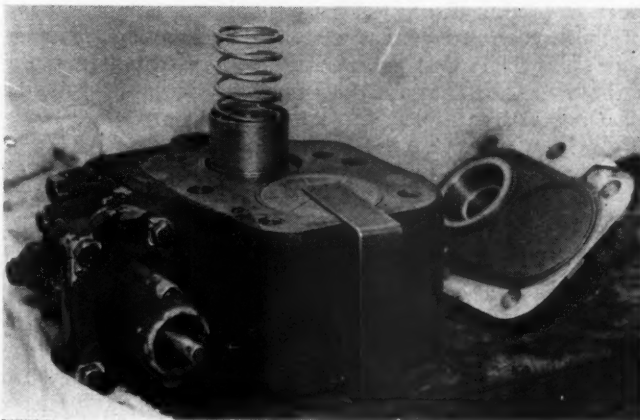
U-clamp for holding by-pass check valves, springs, seat and stop in place while applying the service-valve cover
